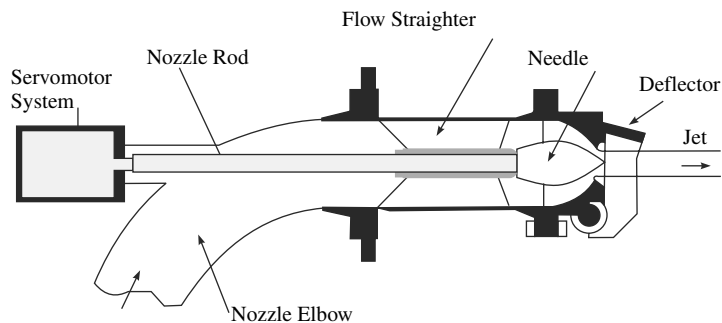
Typical nozzle assembly of a Pelton turbine
